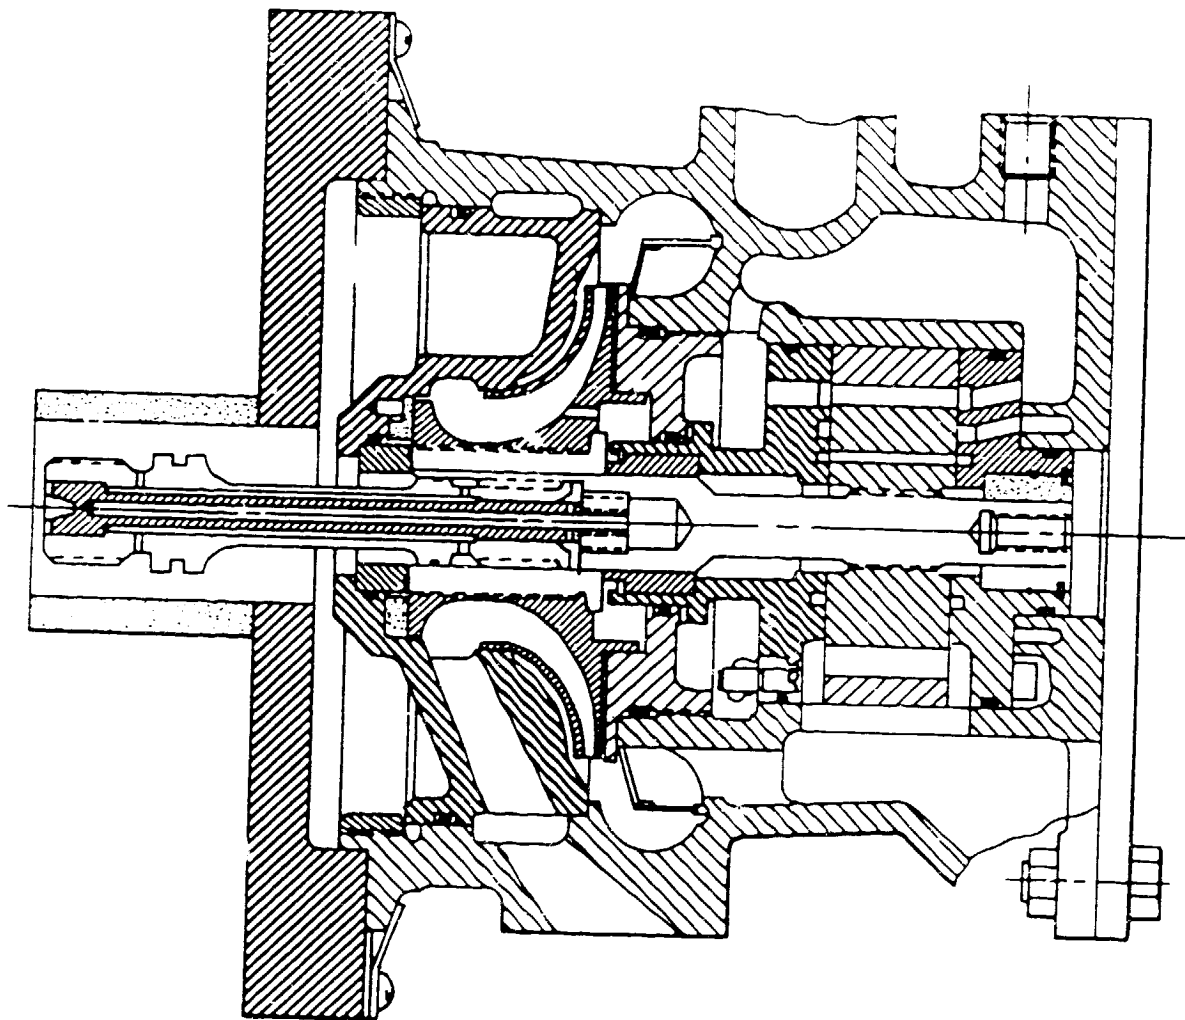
Fuel Vane Pump with Integral Boost and Relief Valve Assembly.
